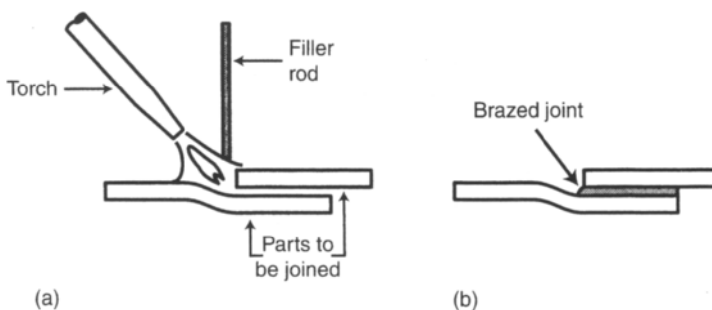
Torch brazing: (a) the process, (b) the final joint.
